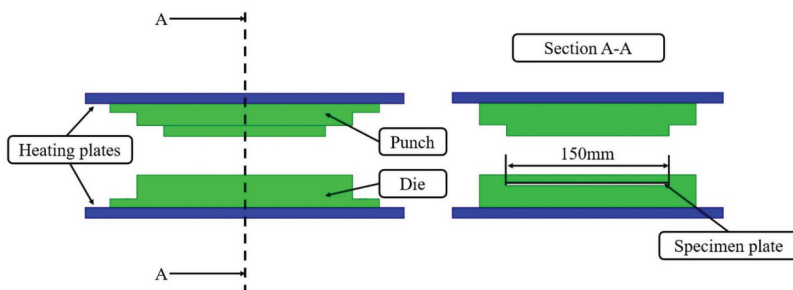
Pressing tool for specimen production, installed inside laboratory press and connected to heating plates.
